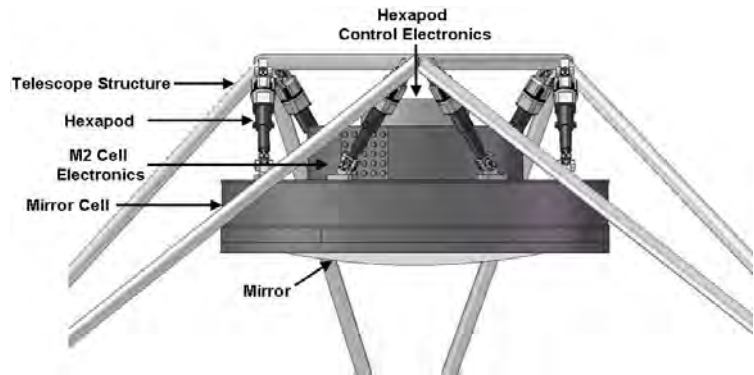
Configuration of Secondary Mirror Assembly (Laser Launch Telescope removed for clarity).
